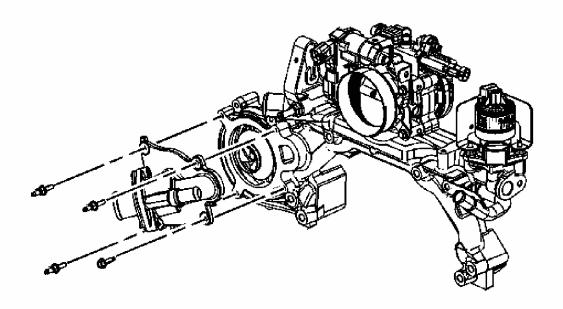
Identifying Water Pump Cover Bolts/Studs Courtesy of GENERAL MOTORS CORP.
